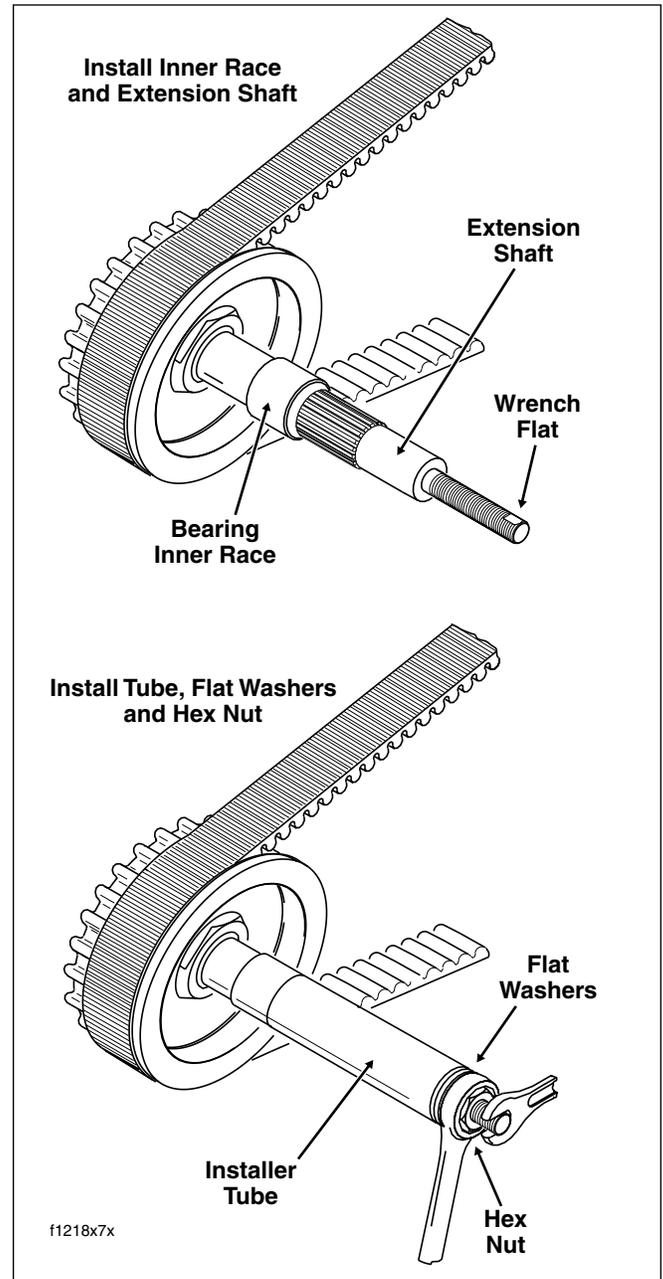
Press Bearing Inner Race onto Mainshaft
